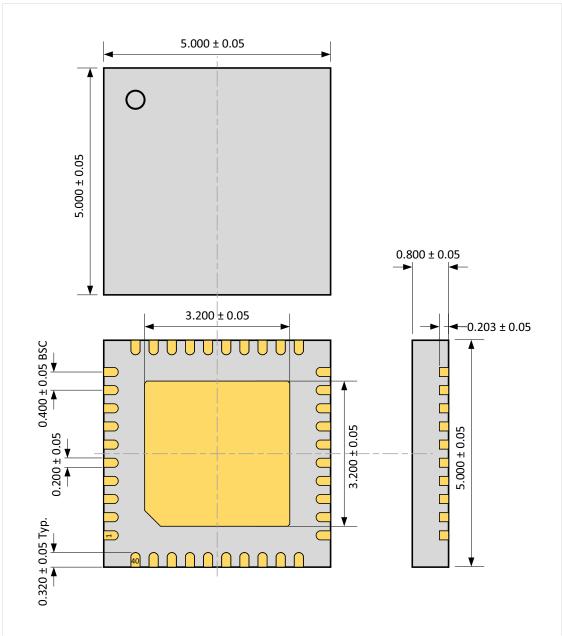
QFN 40-pin 5x5mm Drawing (All Dimensions in mm)
